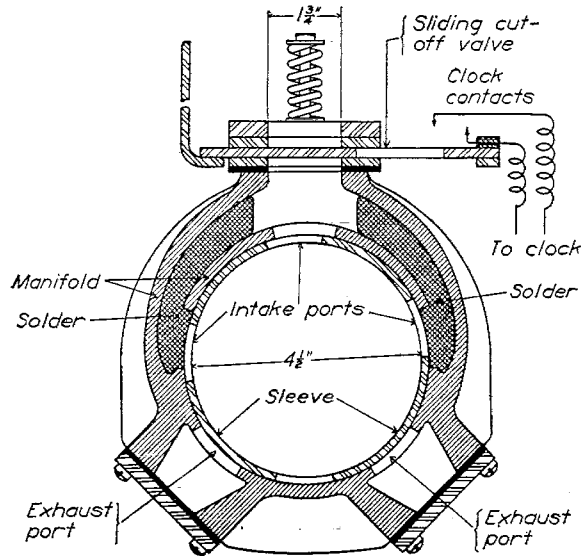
Cross section through ports, manifold, and cut-off valve.
